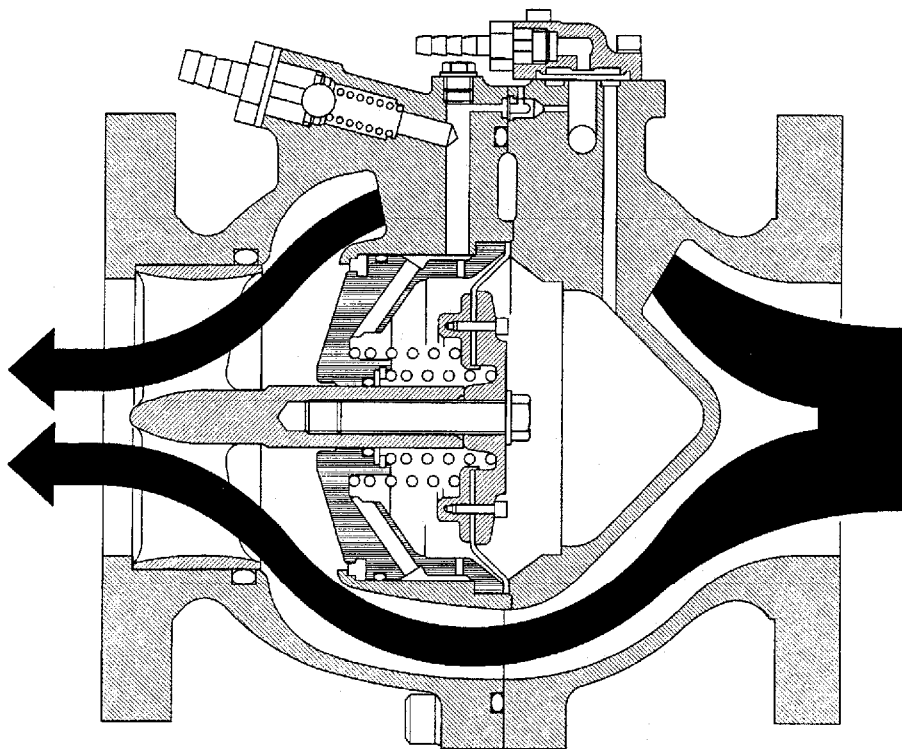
B 4" INLINE PRESSURE CONTROL VALVE - OPEN POSITION
